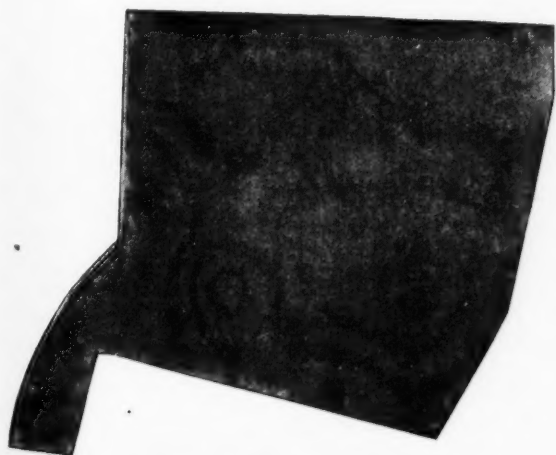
Lower rear quarter panel, assembled and attached in same manner
